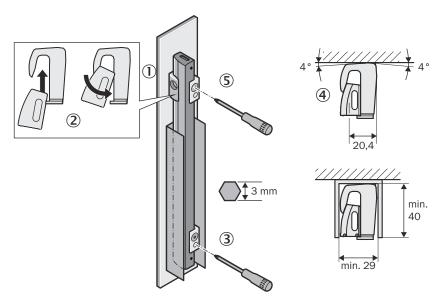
Mounting with C-Fix-Flex bracket, protective field perpendicular to mounting surface
